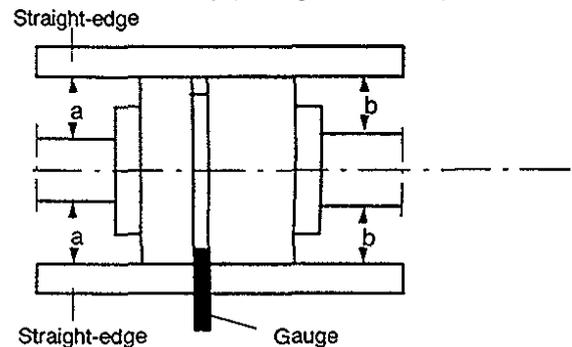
Aligning the coupling with the help of a gauge and a straight-edge
